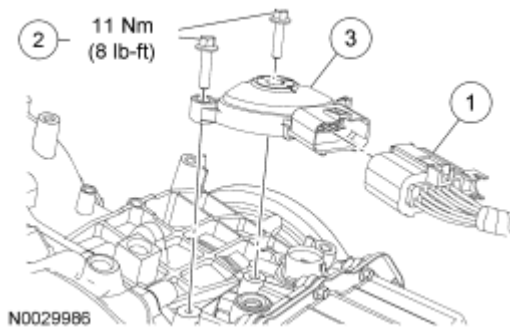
Exploded View Of Transmission Range (TR) Sensor With Torque Specification
